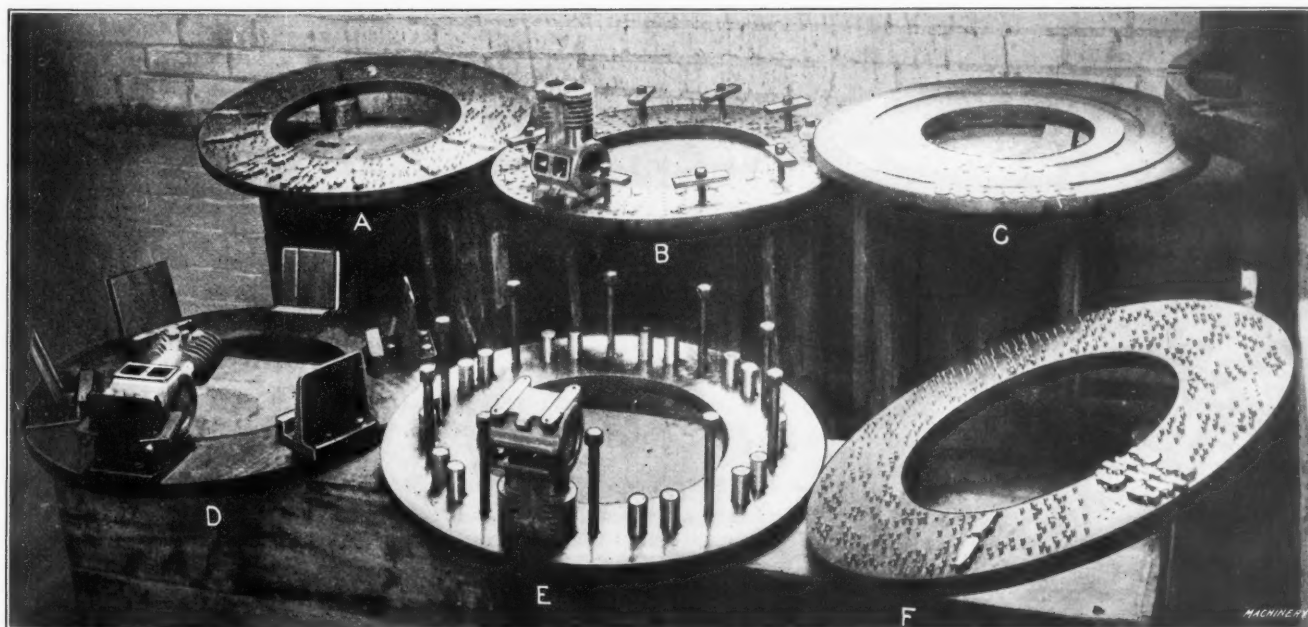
Six Work-holding Fixtures for a Blanchard Grinder
